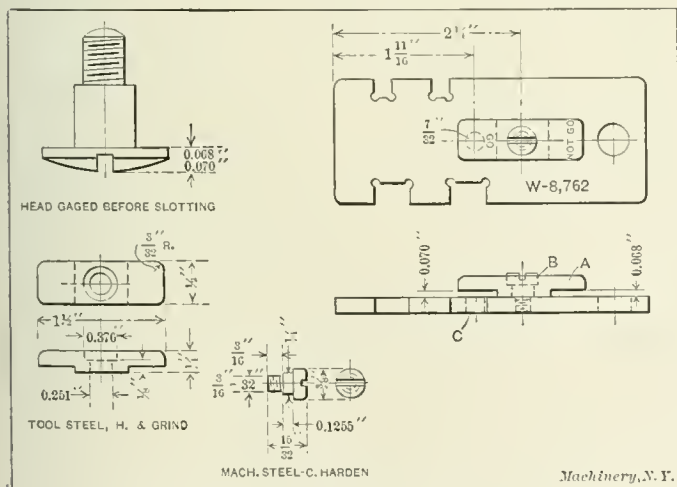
Snap Gage used in Gaging a Round-head Screw
